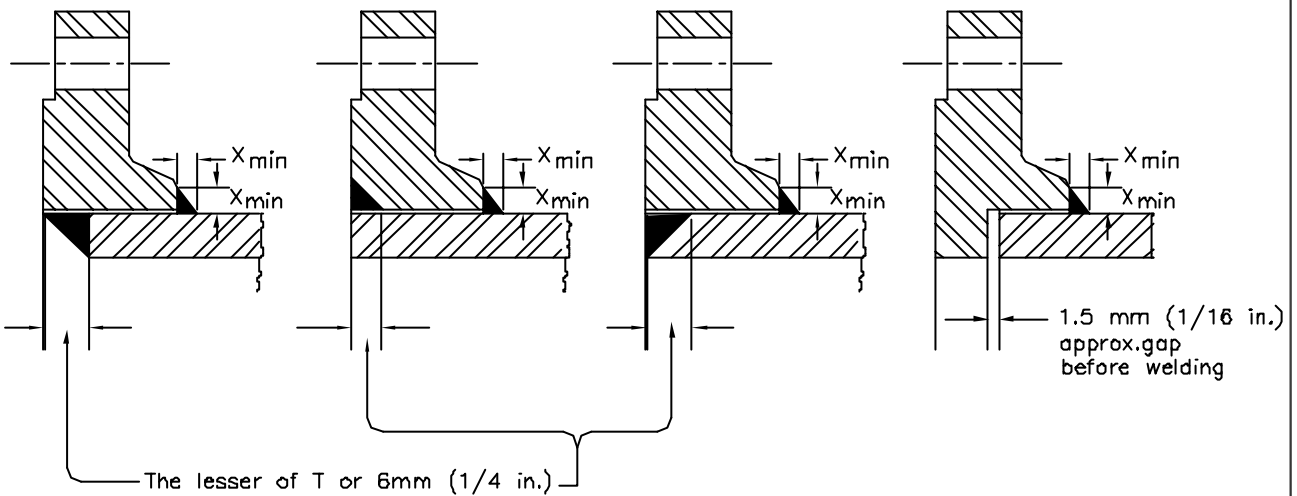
B TYPICAL DETAILS FOR DOUBLE-WELDED SLIP-ON AND
